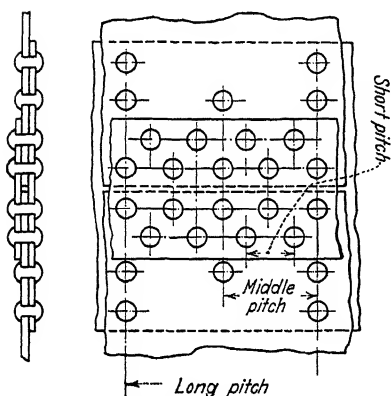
Multiple-riveted butt joint with four rows of rivets.
